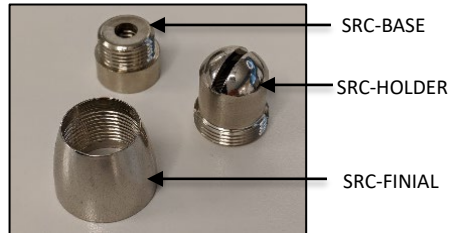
SLIP RING COUPLER (1) CONTENTS
